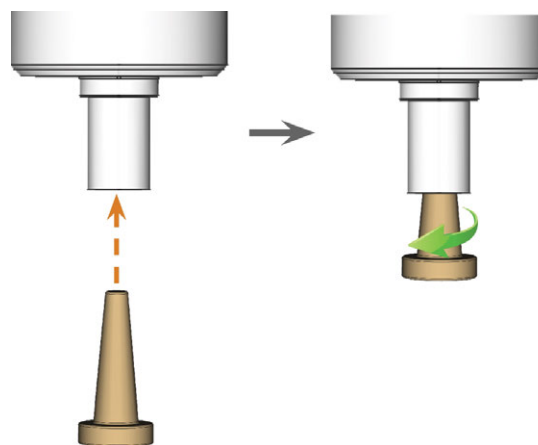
CLEANING THE INNER CONE OF THE SPINDLE
